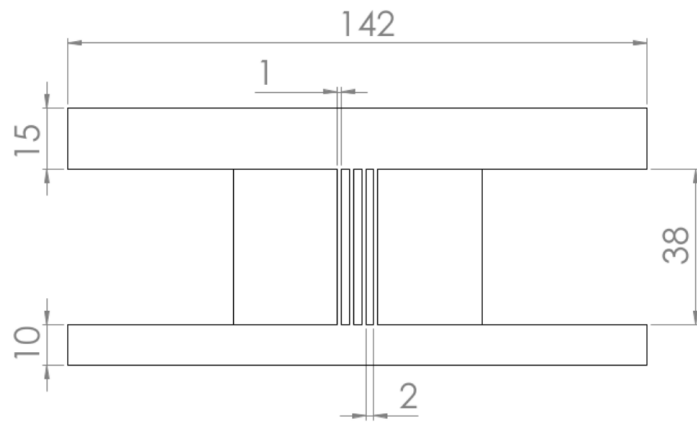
Burner technical drawing - top view (dimensions in mm).
